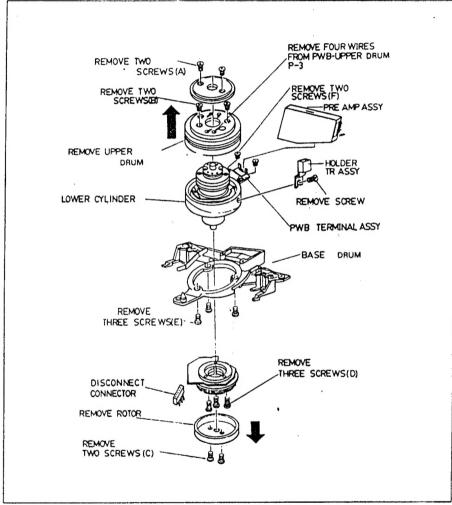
Video Head Removal and Drum Motor Assembly Removal.
